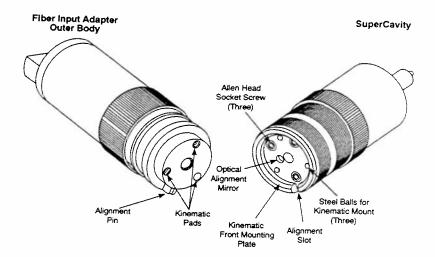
External view of the SuperCavity and the Fiber Input Adapter showing the details of the kinematic mount.
